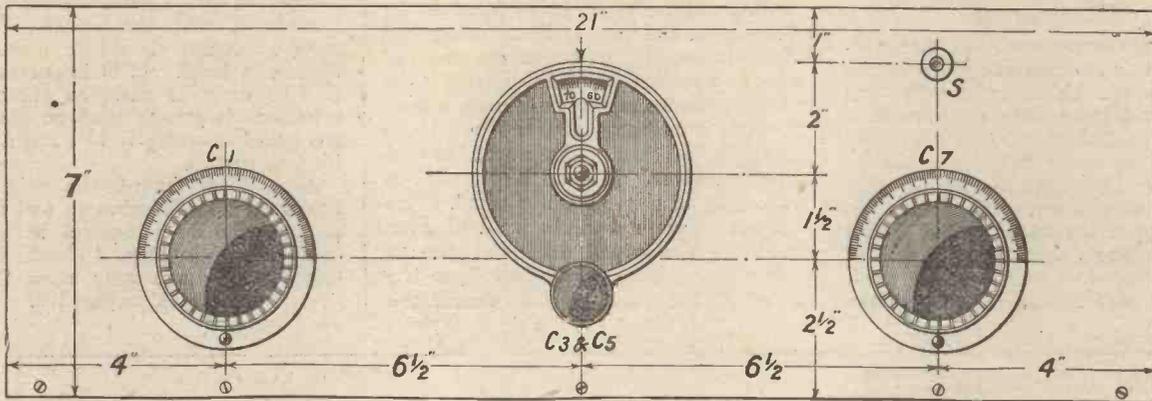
Drilling dimensions may be taken from this front-of-panel drawing. Blueprint No. 10C74A.
